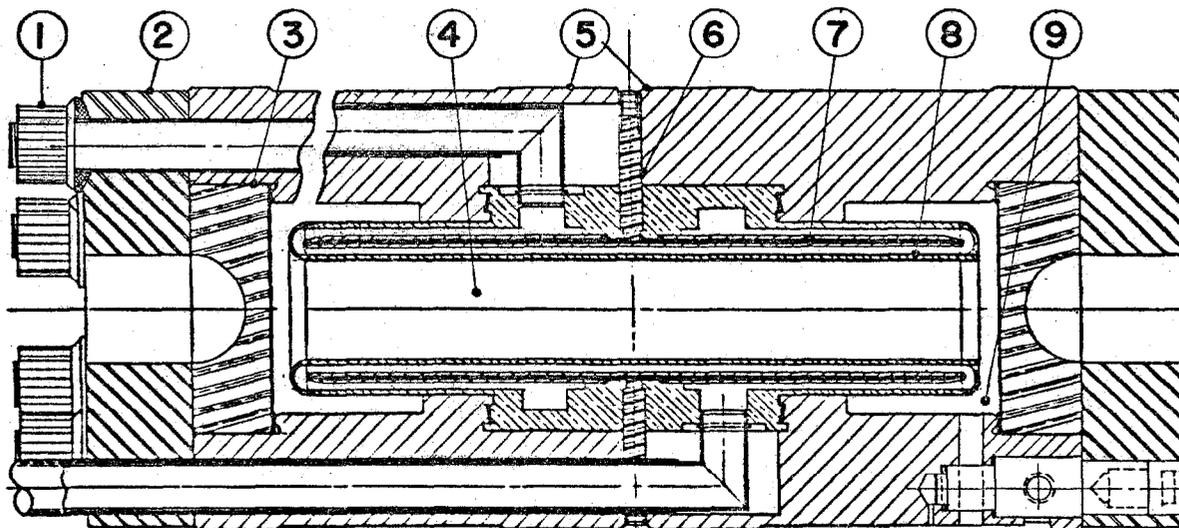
Lithium lens prototype: 1-Retaining bolt; 2-End flange; 3-End caps; 4-Lithium; 5-Current contacts; 6-Ceramic insulator; 7-Water septum; 8-Inner cooling jacket; 9-Fill port.
